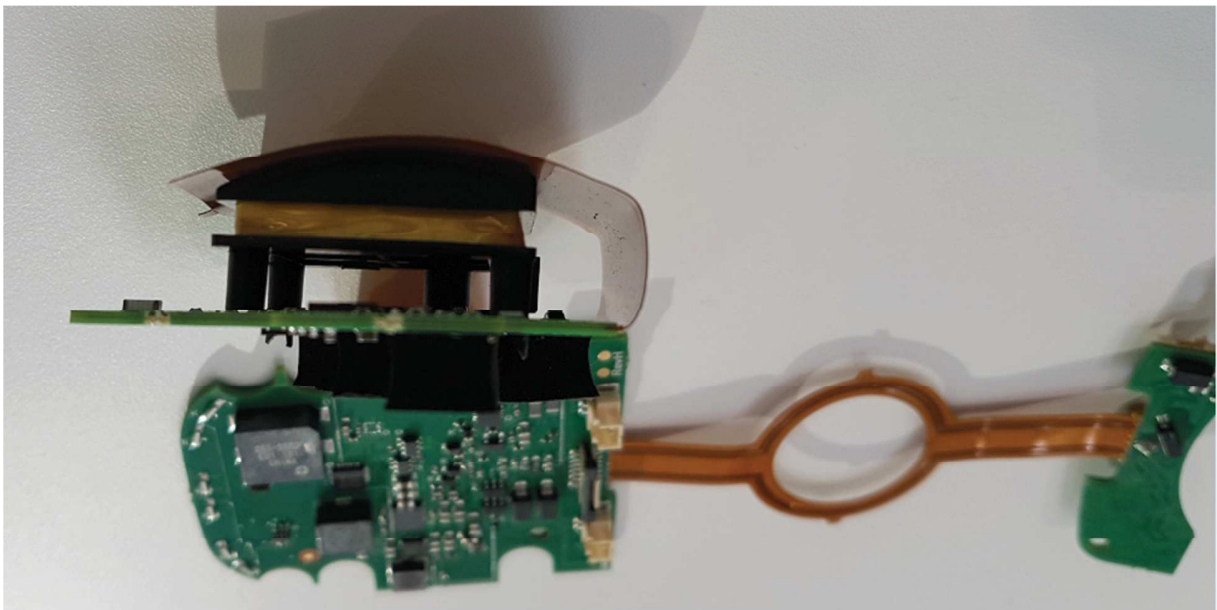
Side view of flexible PCB of Radio Module removed from main housing
